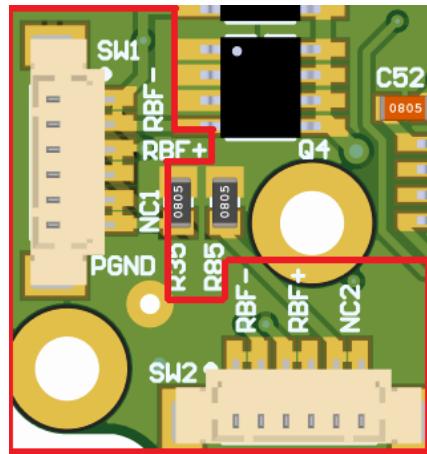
Kill-switches PicoBlade connectors on the PCB.
